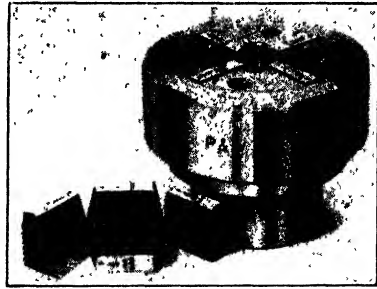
Threading die. (Courtesy Pratt & Whitney.)
